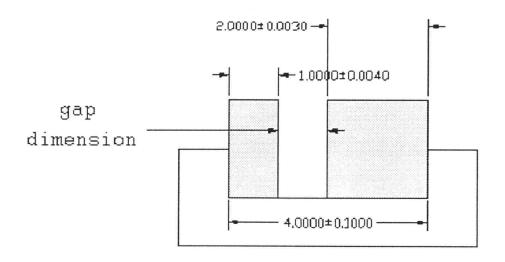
Two Types of the Sum Dimension; Assembly Dimension and Gap Dimension
